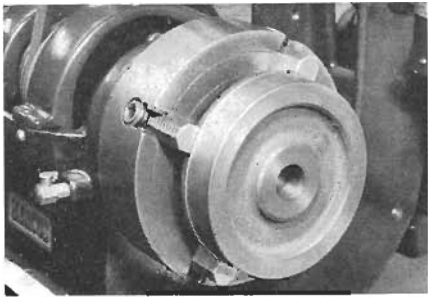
Gear Blank held in Lathe Chuck after completion of First Operation
